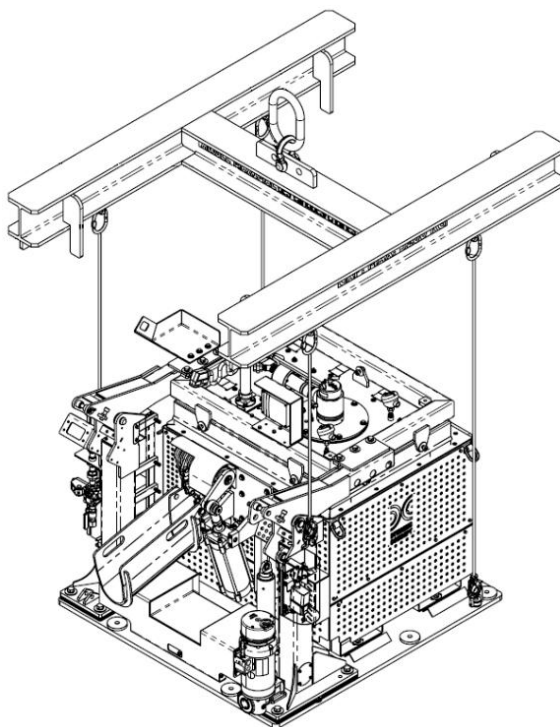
Lifting assembly for the DYNAPRIME (see drawing A00-24121-EX-1000)
